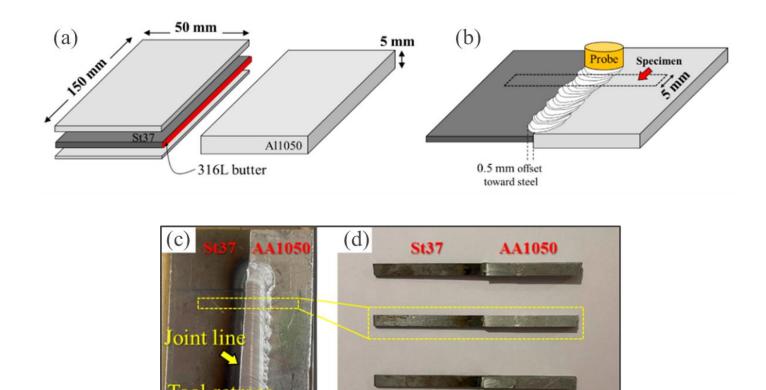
(a, b) Schematic of AA1050/St37 sheets arrangement for dissimilar joining before FSW process and after FSW process, (c) FSWed sample and (d) Tensile specimens.
